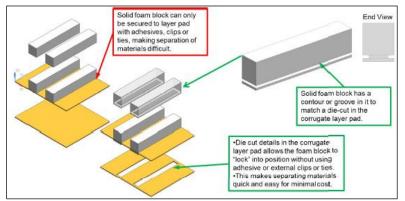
Die Cut Foam Design Allows the Foam Block to "Lock" into the Die Cut Layer Pad without Using Adhesives
